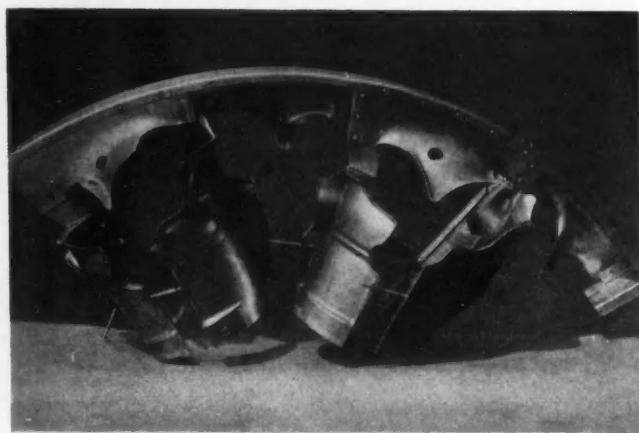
Rear View of Late-Type Pressure Baffles for Use on a Two-Row Engine
